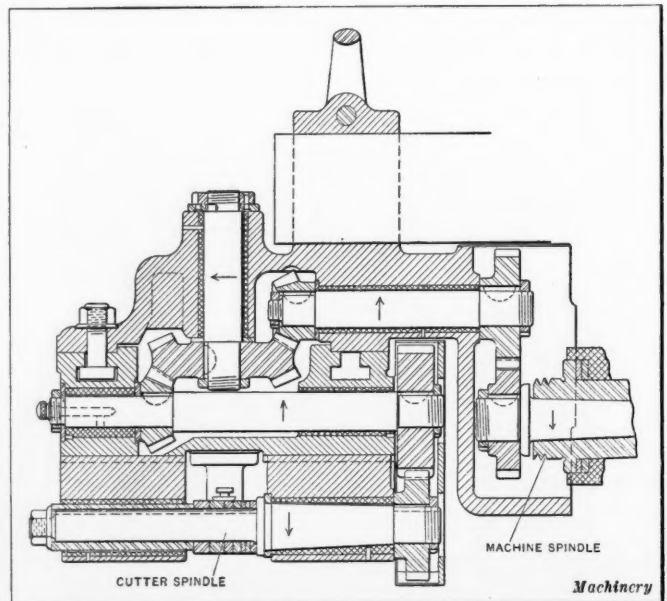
Vertical Cross-sectional View of Attachment, showing how Drive is taken from Machine Spindle
